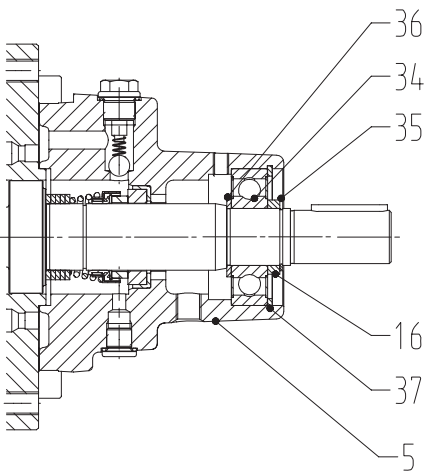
SN..ER..D, external bearing, incapable of relubrication, mechanical seal
